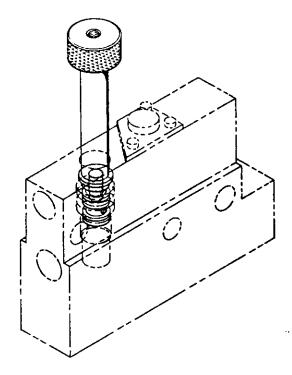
Removal of Sleeve, Part No. 42582, Using Sleeve Puller, T100345-1
